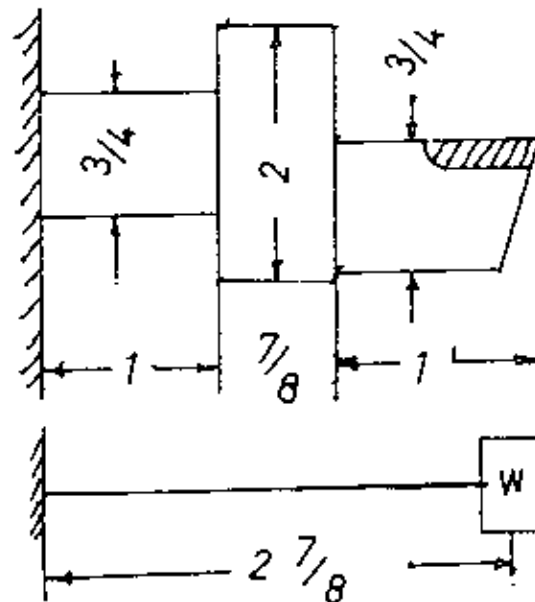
TOOL HOLDER EQUIVALENT SYSTEM
